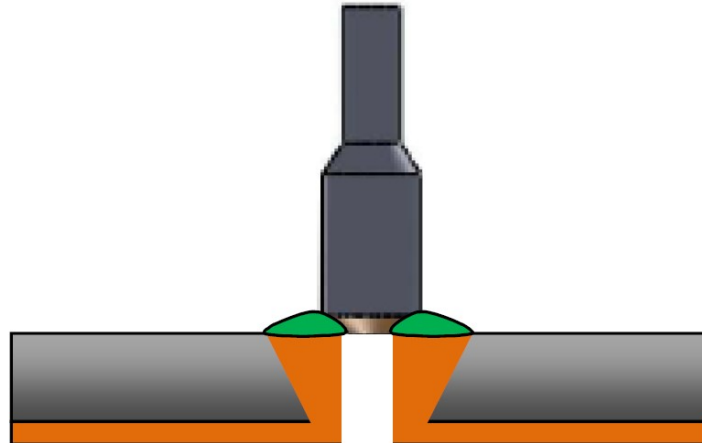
Set on branch connection adjusted and welded as determined by the engineering design
